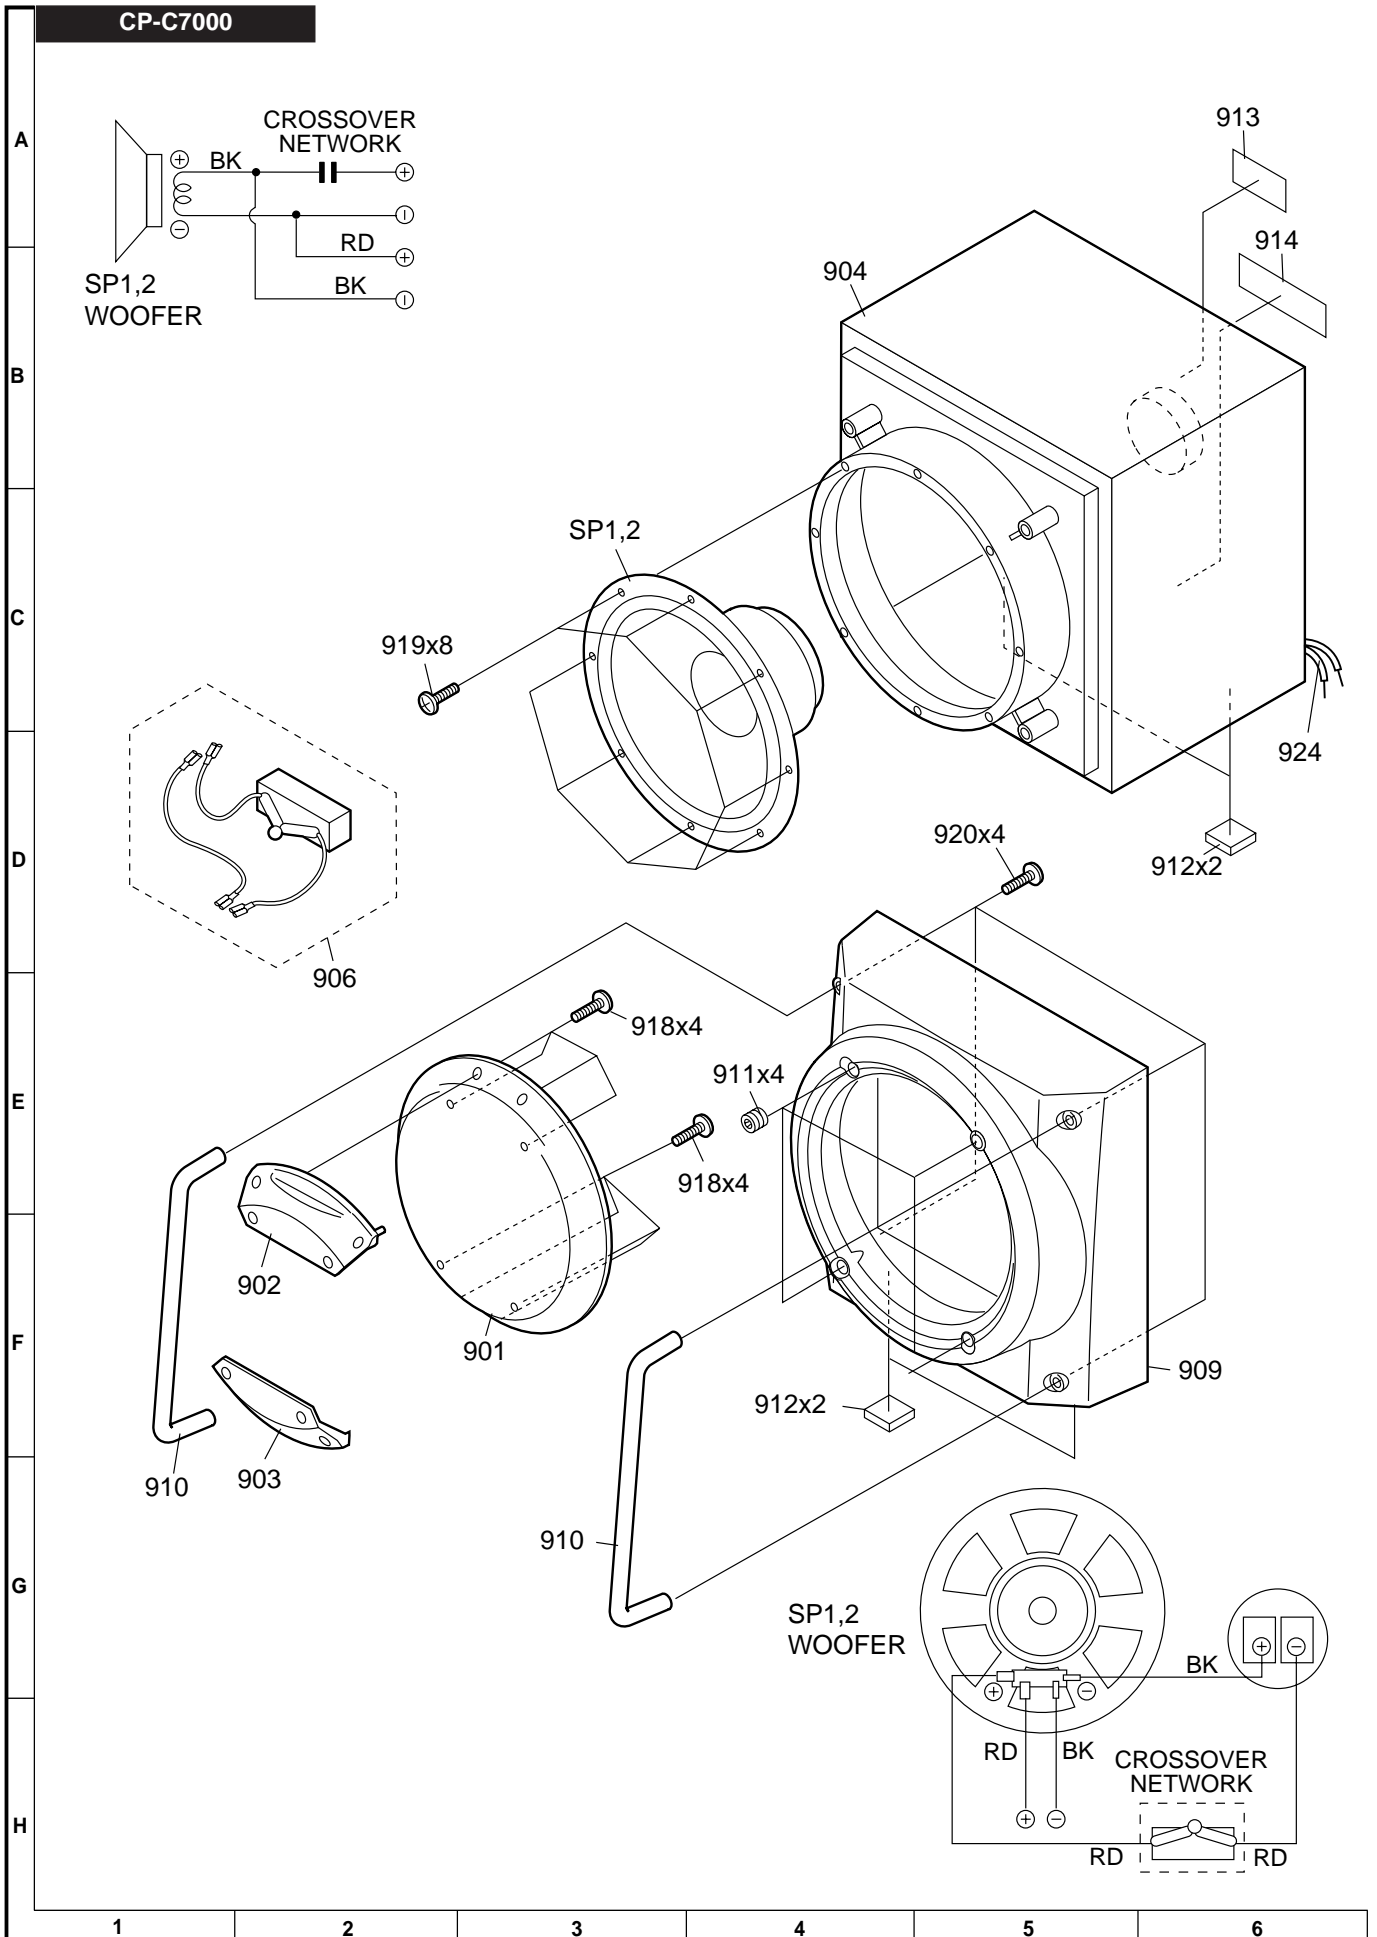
SPEAKER EXPLODED VIEW (1/2)
